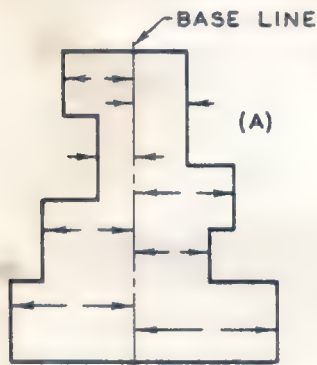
BASE LINE DIMENSIONING FROM TWO MACHINED EDGES
